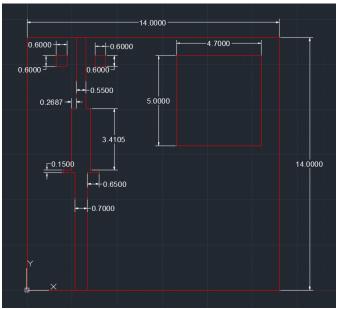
Base Plate for Holding Syringe, Stepper Motor, Rack and Gears, Dimensions in cm
